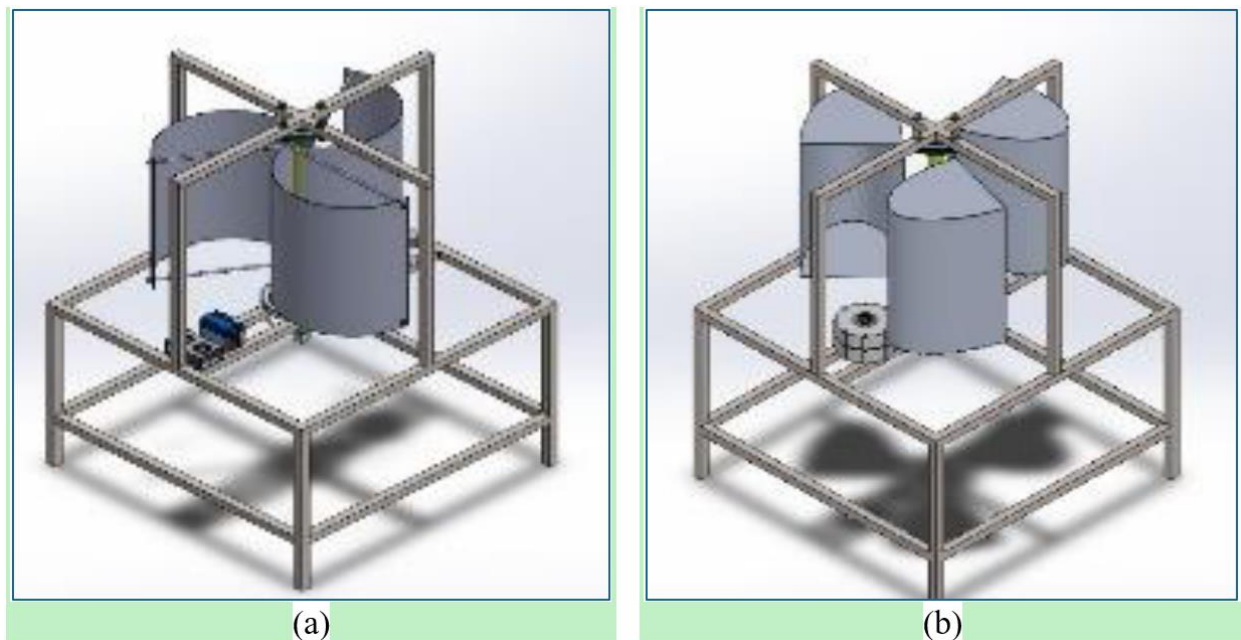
Wind turbine test prototypes: (a) Savonius, (b) H-type Darrieus.
